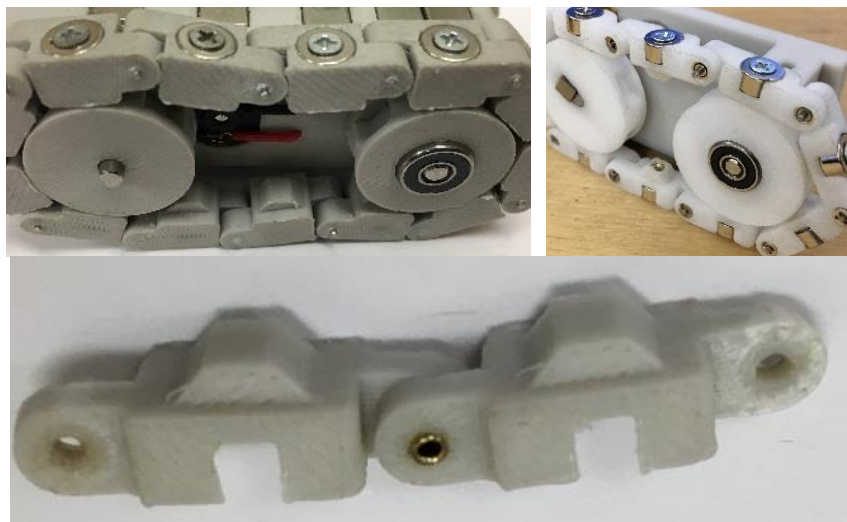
Pin design (top left), bearing design (top right), and rivet design (bottom).
